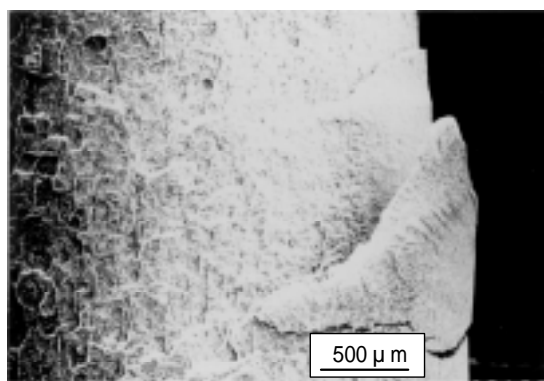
Ratchet mark on fatigue fracture surface (SRIQ)
